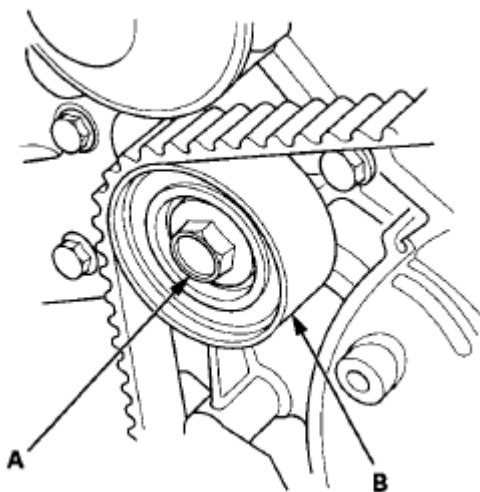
Identifying Idler Pulley And Idler Pulley Bolt
